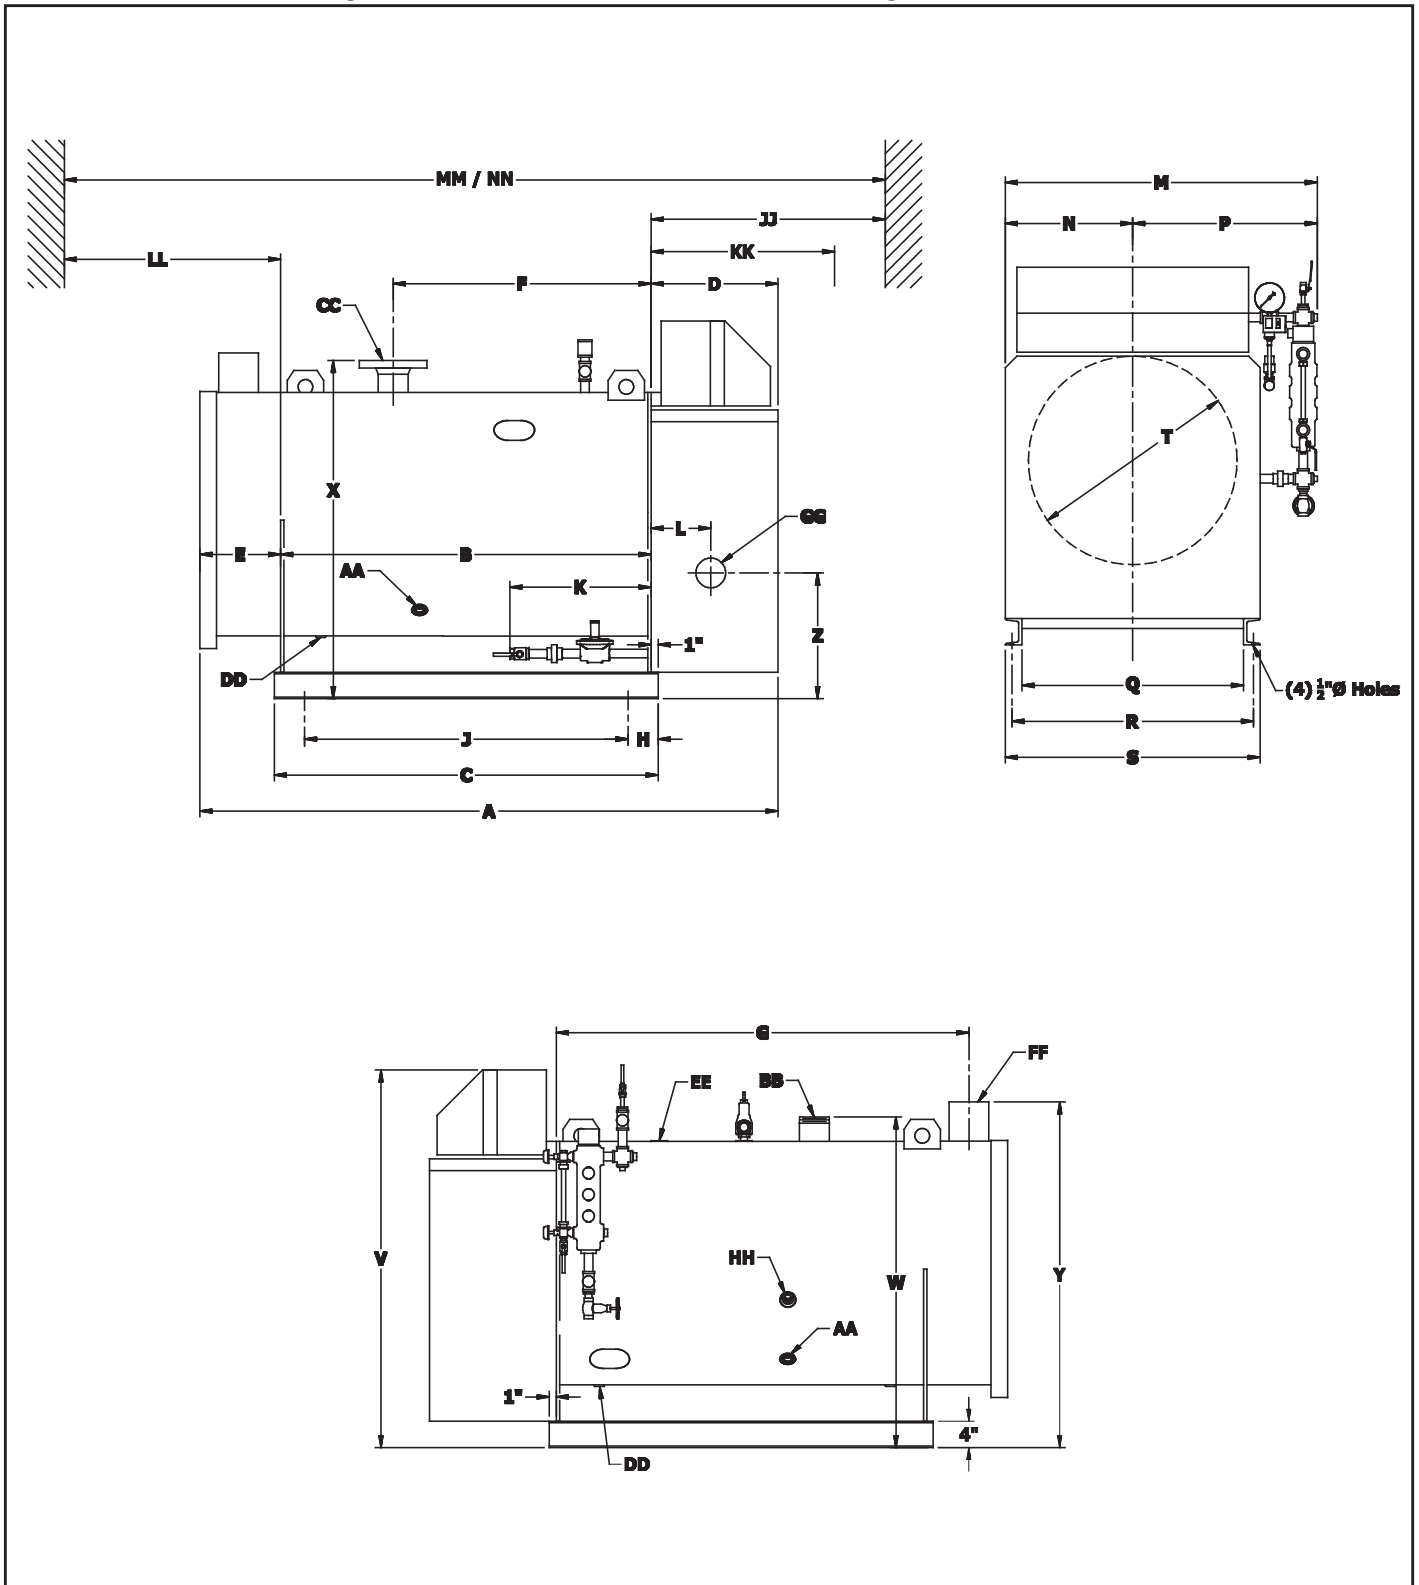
ClearFire-H Dimensions and Ratings (sheet 2 of 2)
